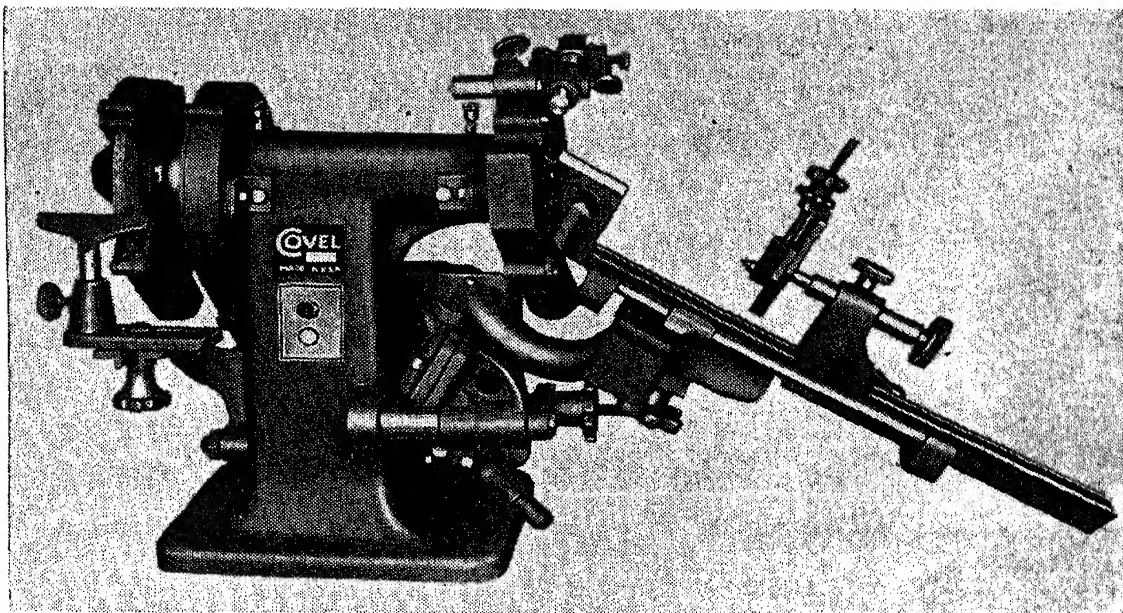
A twist drill grinder. (Courtesy Covell Manufacturing Co.)
